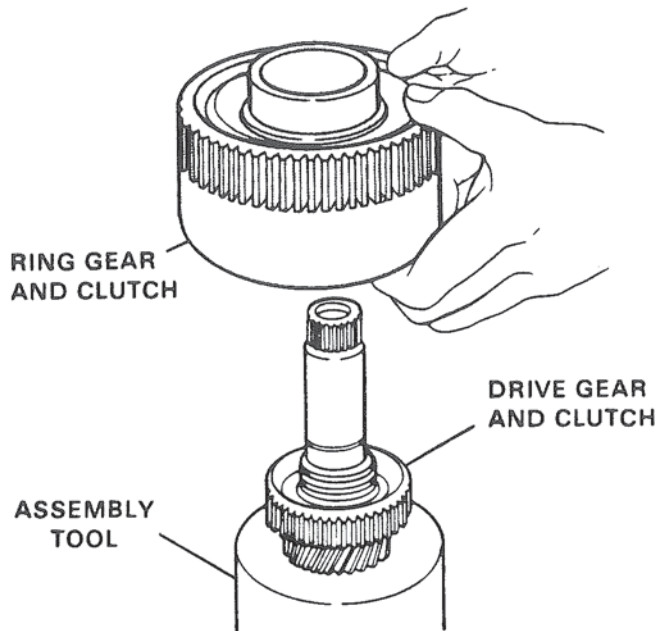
Assembling Ring Gear and Clutch Assembly Drive Gear.
